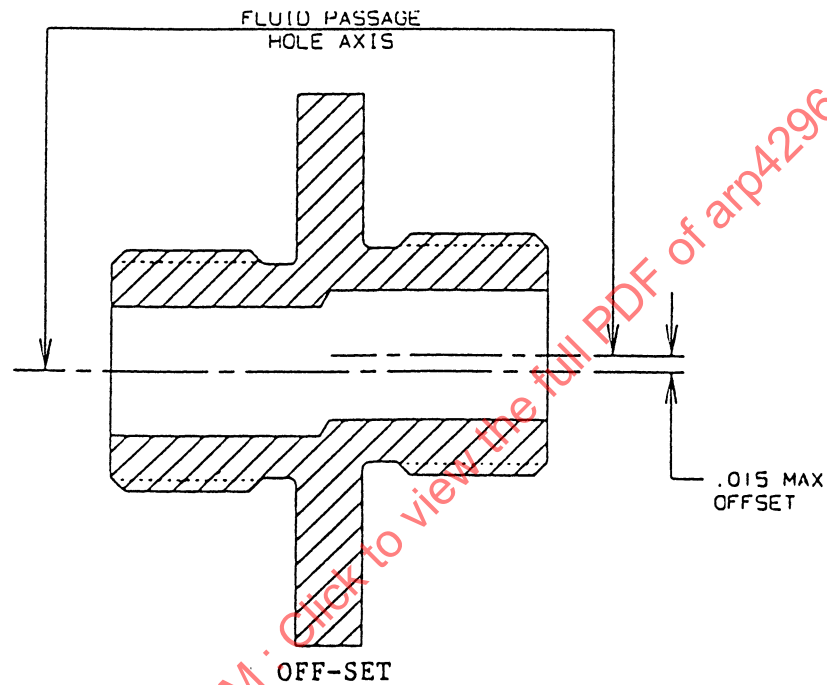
Runout of Fluid Passage Holes, Straight Fittings
